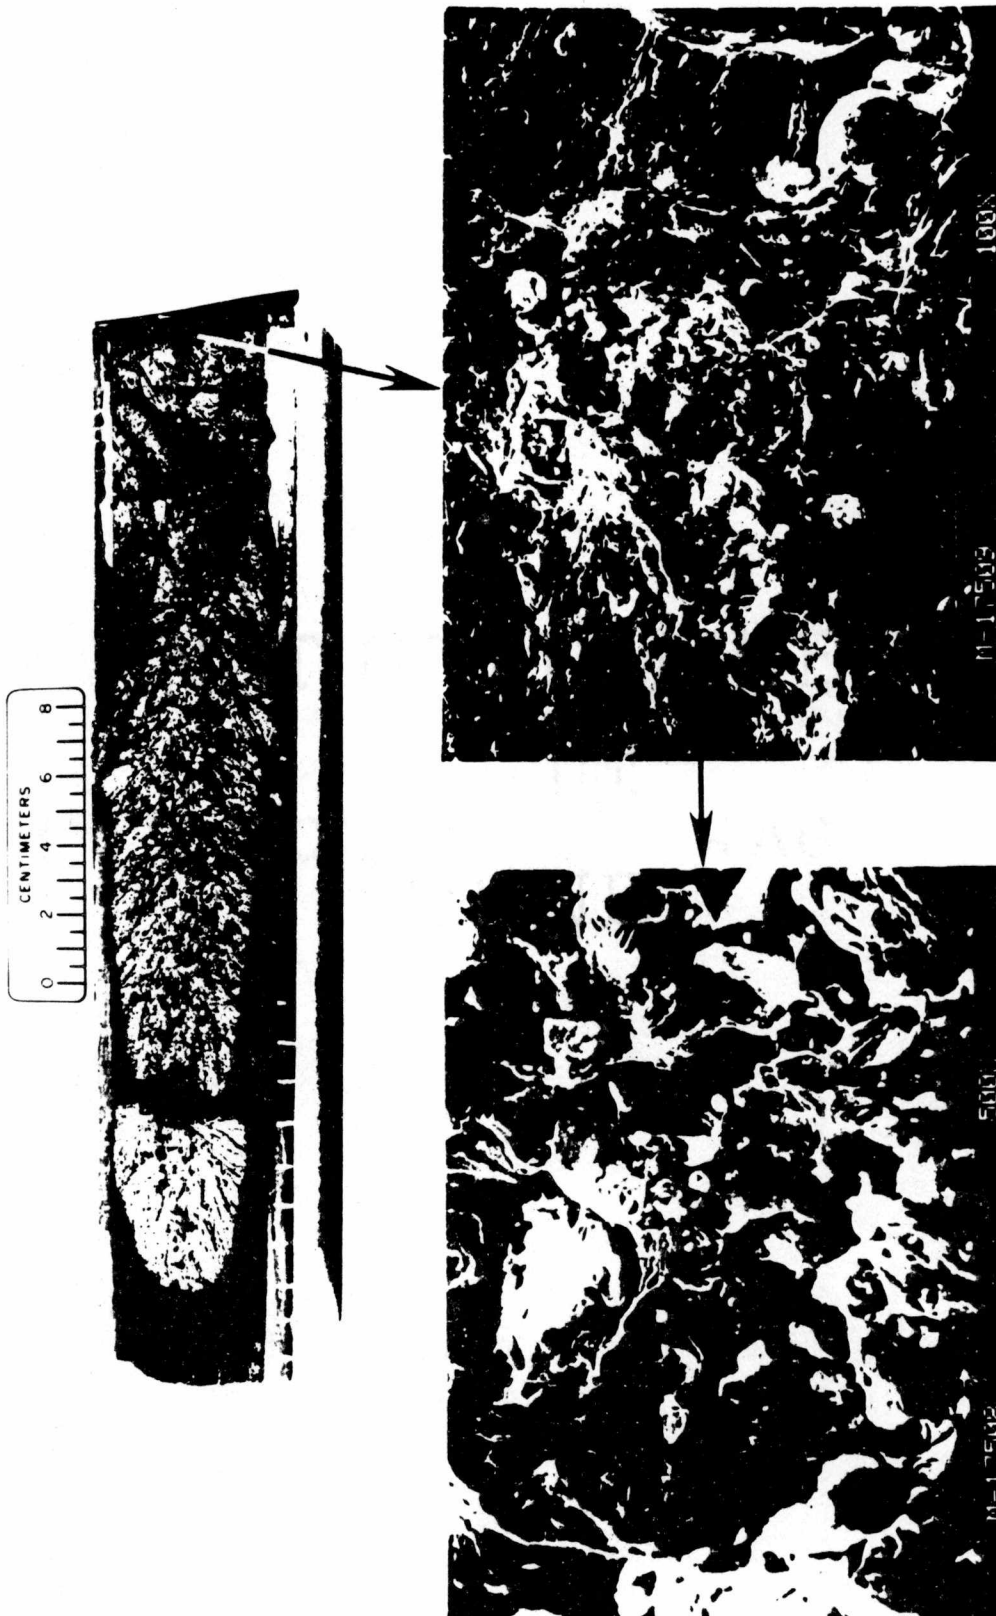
Scanning electron fractographs revealing no evidence of significant ductile tearing at first crack initiation event: Test WP-1.2.
